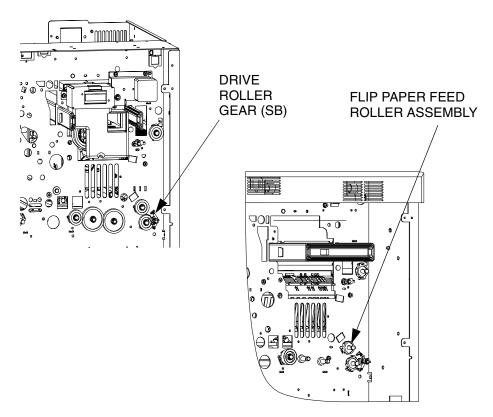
2 Removal of the Flip Paper Feed Roller Assembly
